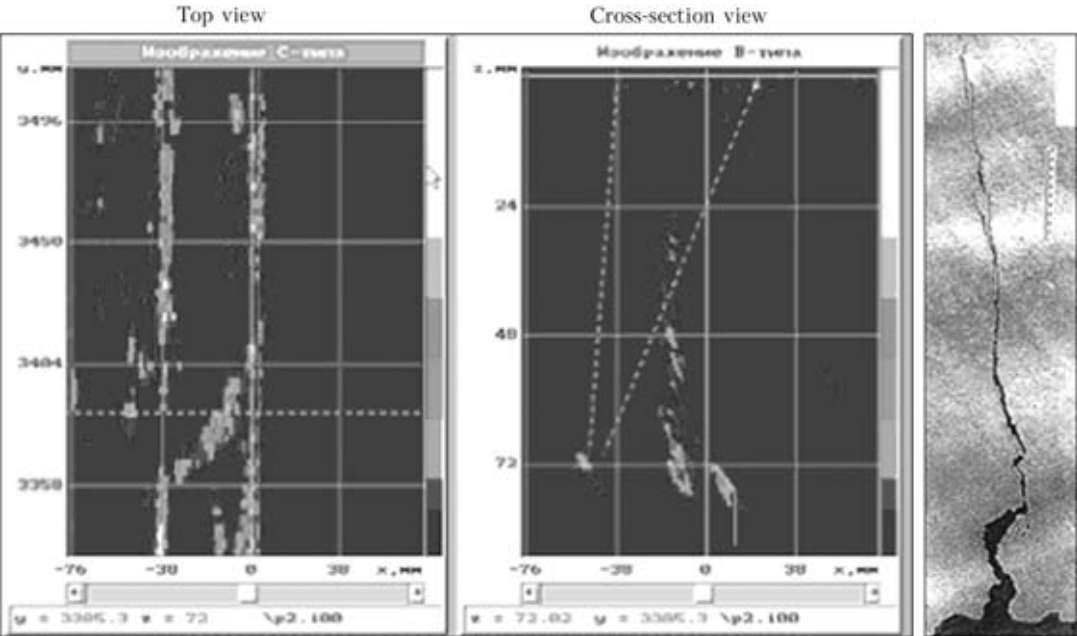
Image of a defect in welded joint with PET angle of incidence 40°
